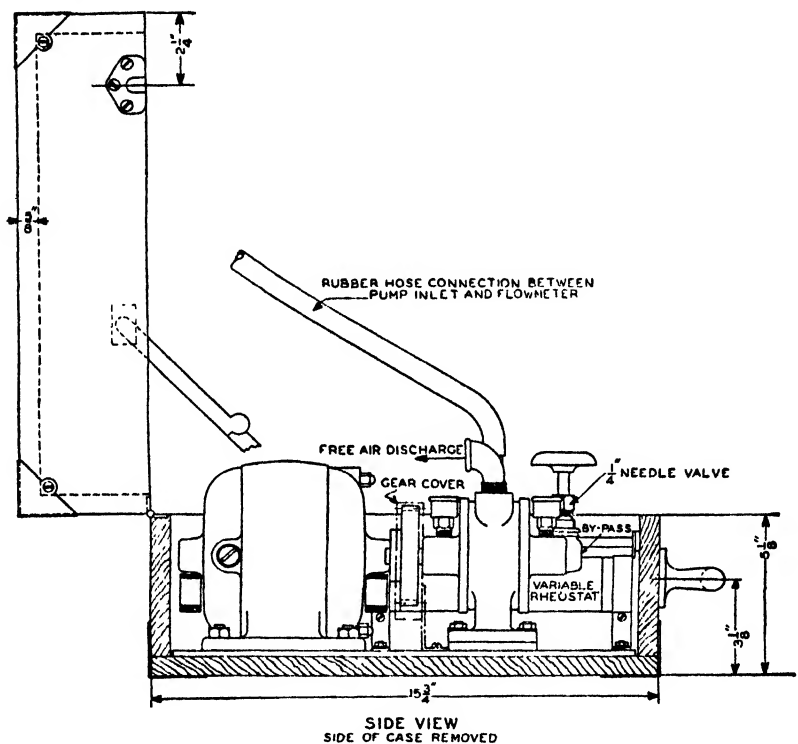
Drawing of electrically driven suction apparatus, side view
